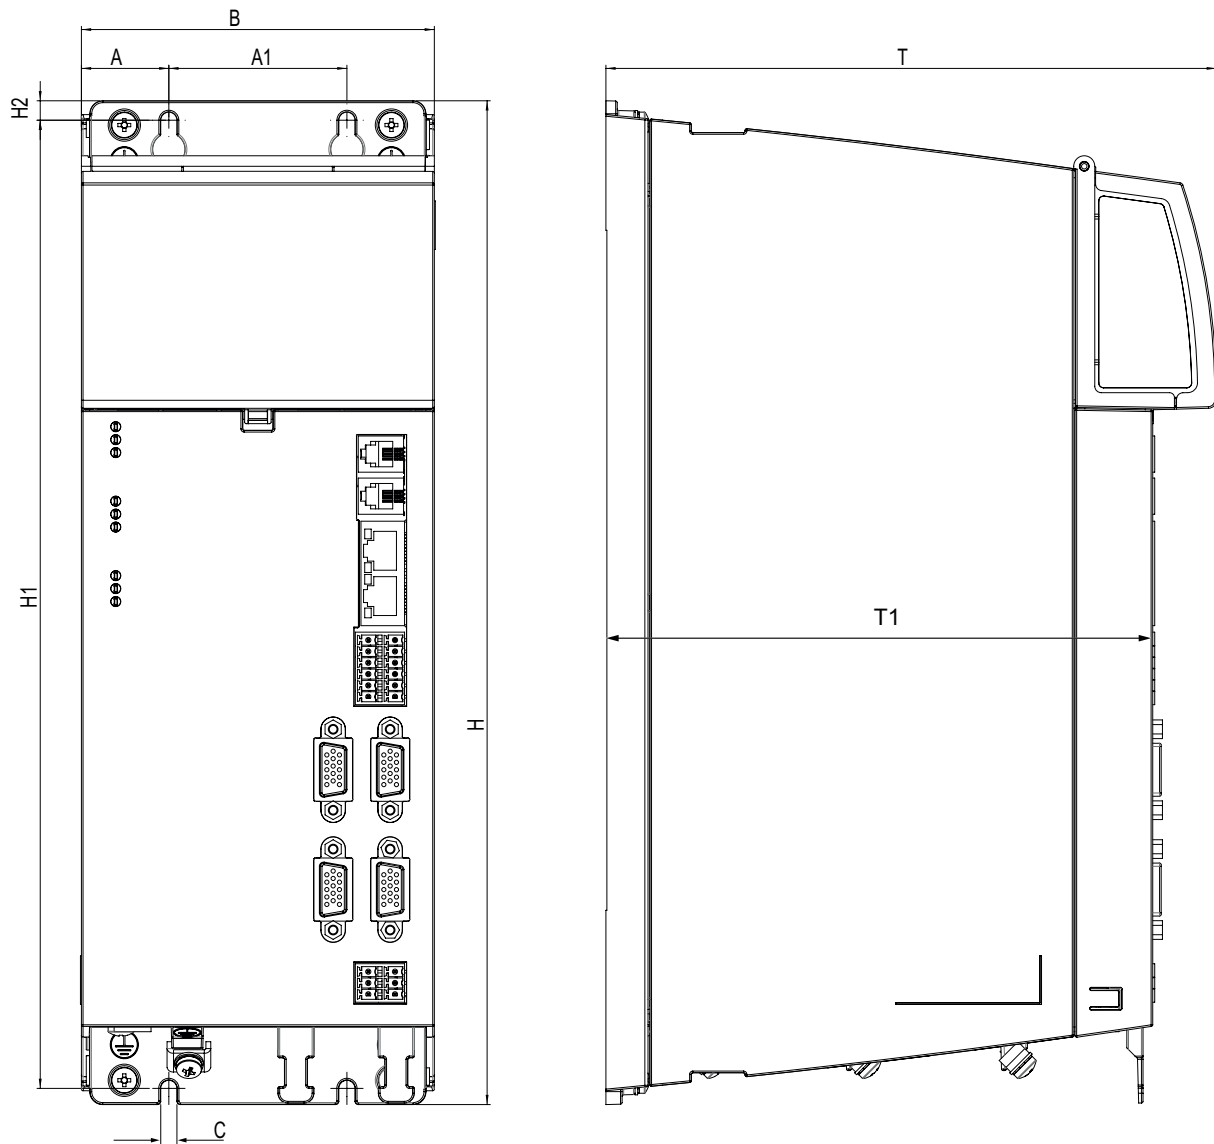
Dimensional drawing JM-3000 servo amplifier BG2 Coldplate (dimensions see Table 2.2)
